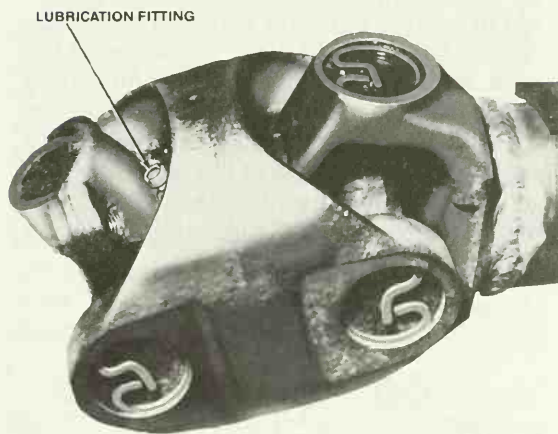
Some universal joints have a lubrication fitting for periodic lubrication. (GMC Truck and Coach Division of General Motors Corporation)
